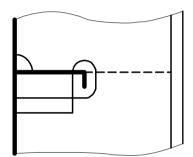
End connection of ordinary stiffener One large collar plate
